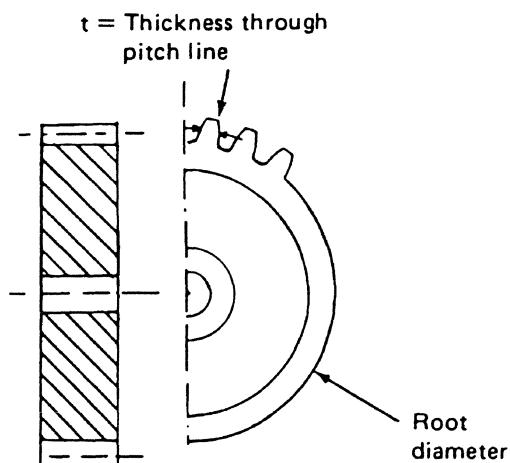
Plastic design of the steel gear shown in Fig. 8-8.
